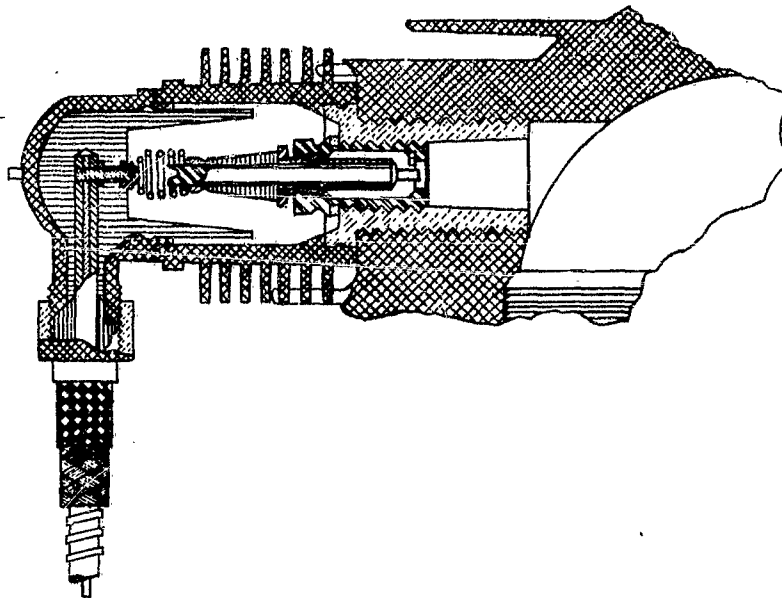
B Spark-Plug Cooler and Radio Shield
